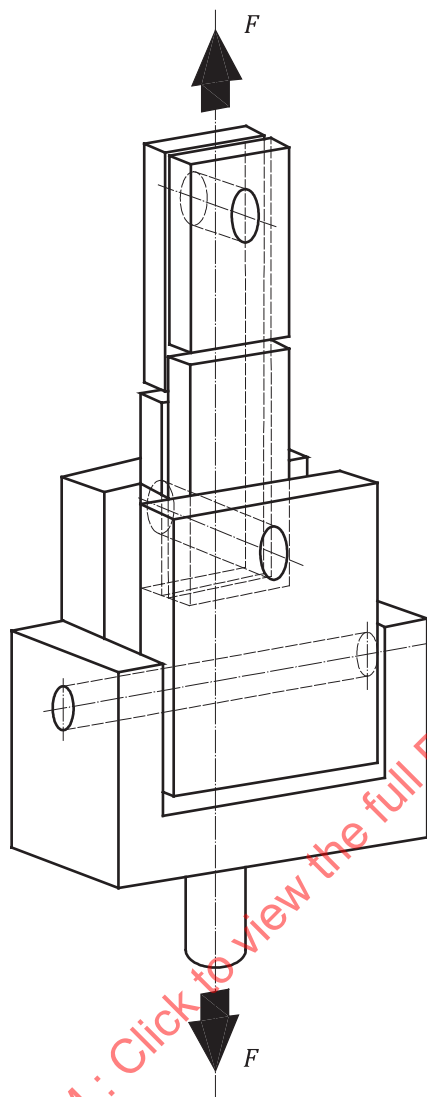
Example of device for loading the specimen in a tensile-testing machine
